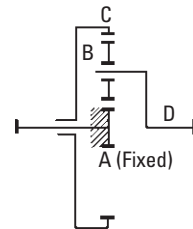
(b) Solar Type Planetary Gear Mechanism
